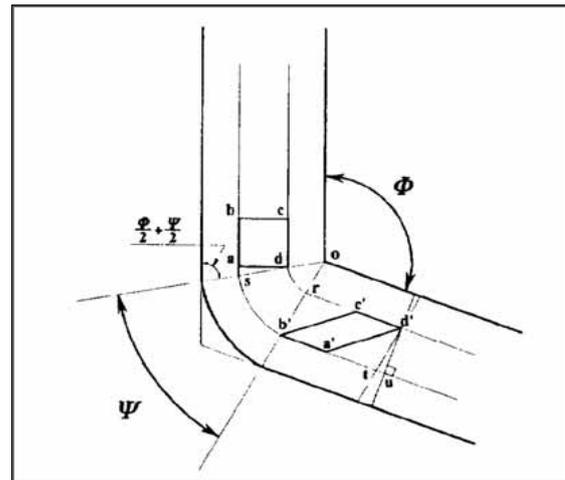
Schematic drawings of a deforming element moving through the ECAP die [8]
